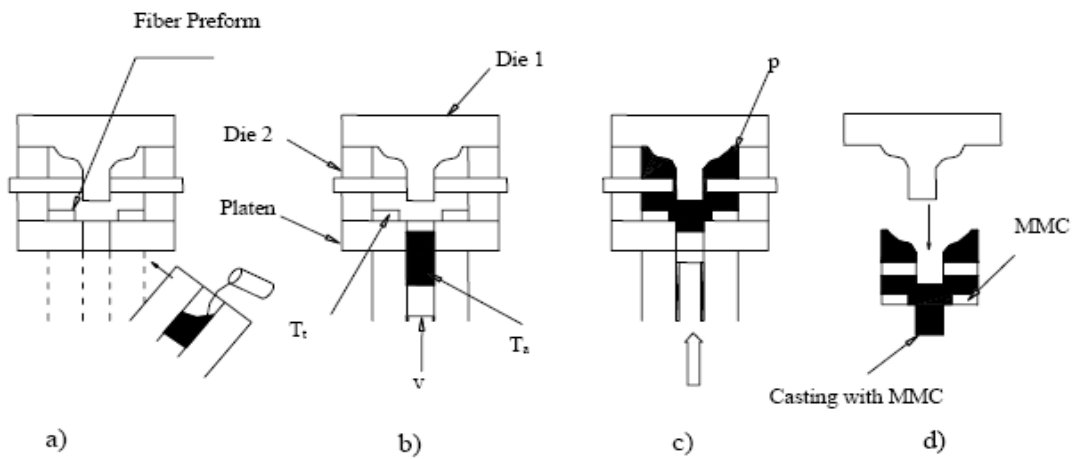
Sequences of the Squeeze casting process with a vertical machine.
